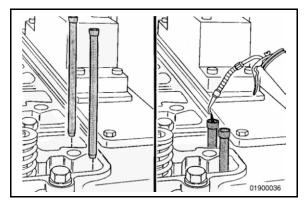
INSTALL THE PUSH TUBES AND LUBRICATE THE PUSH TUBE SOCKETS
